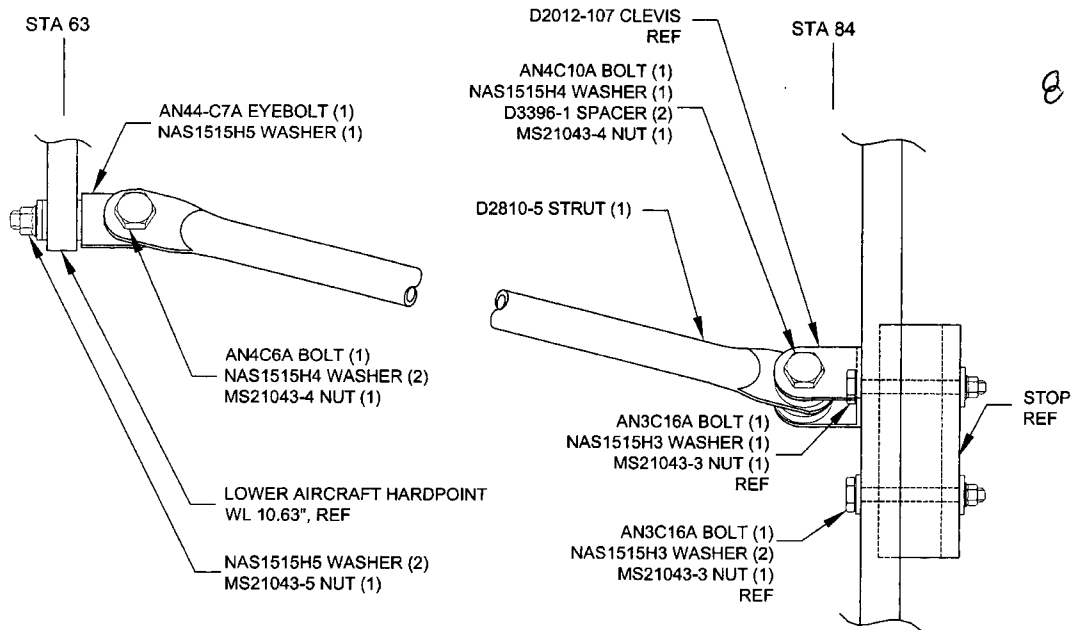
Strut Detail for D412-630-033/-034 *Heli-Access-Step™* Installation
